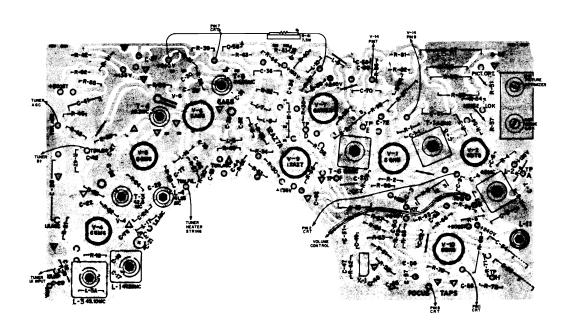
ETCHED PRINTED CIRCUIT BOARD, TOP VIEW
